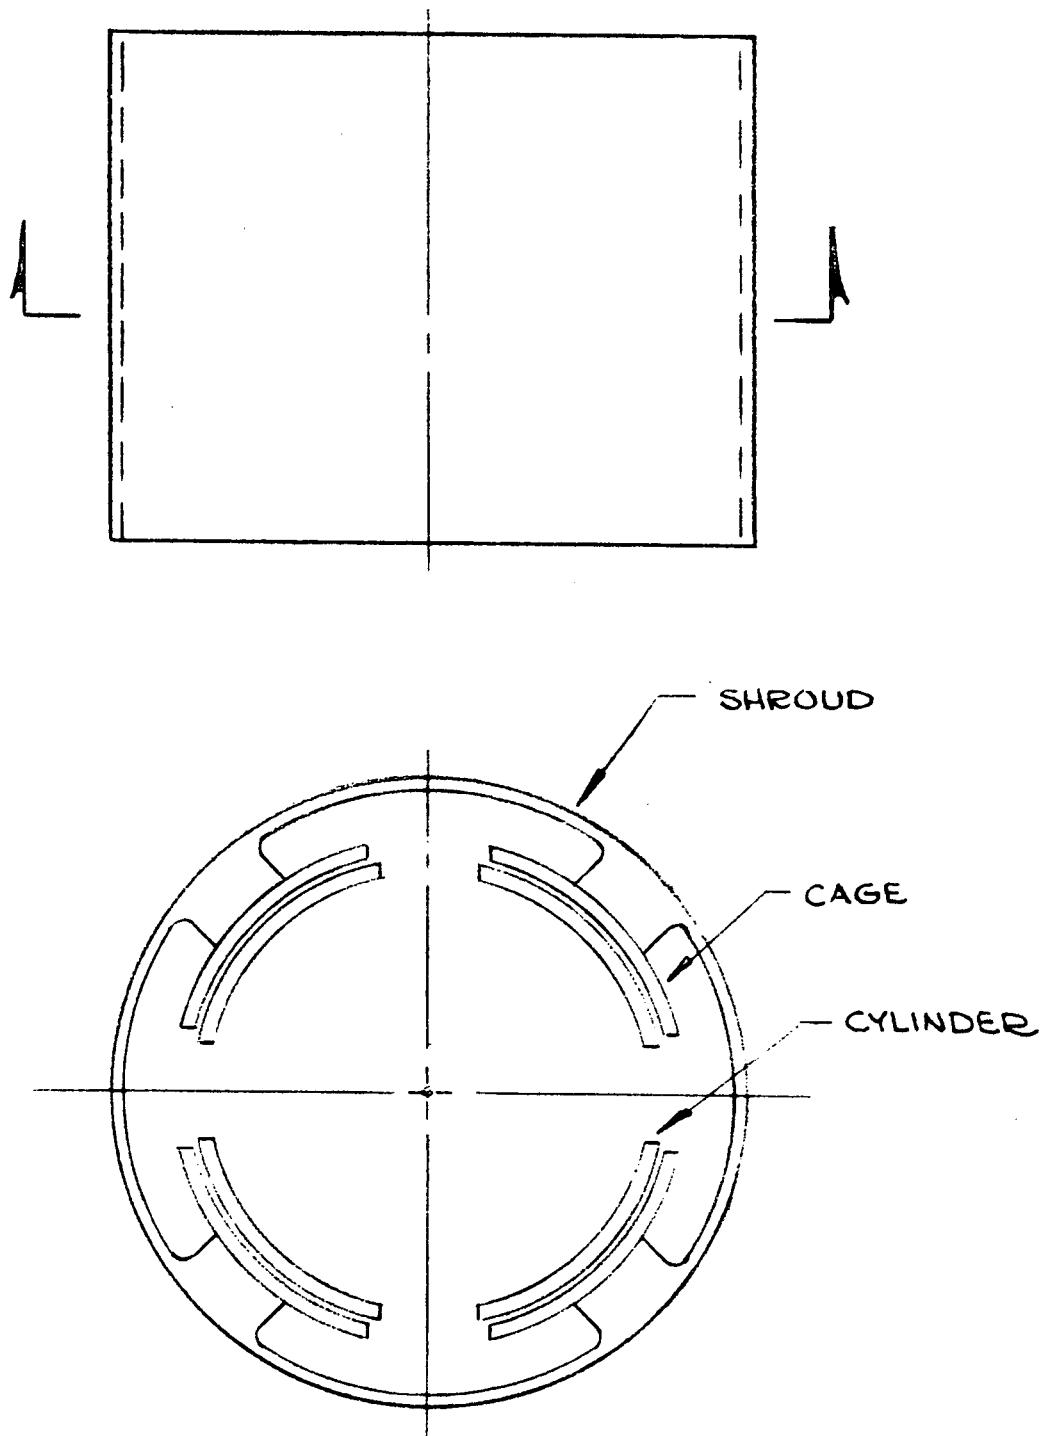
PROTOTYPE CAGE AND CYLINDER WITH SHROUD
